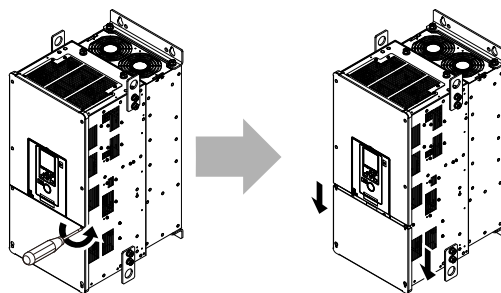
Loosen the Terminal Cover Mounting Screws
